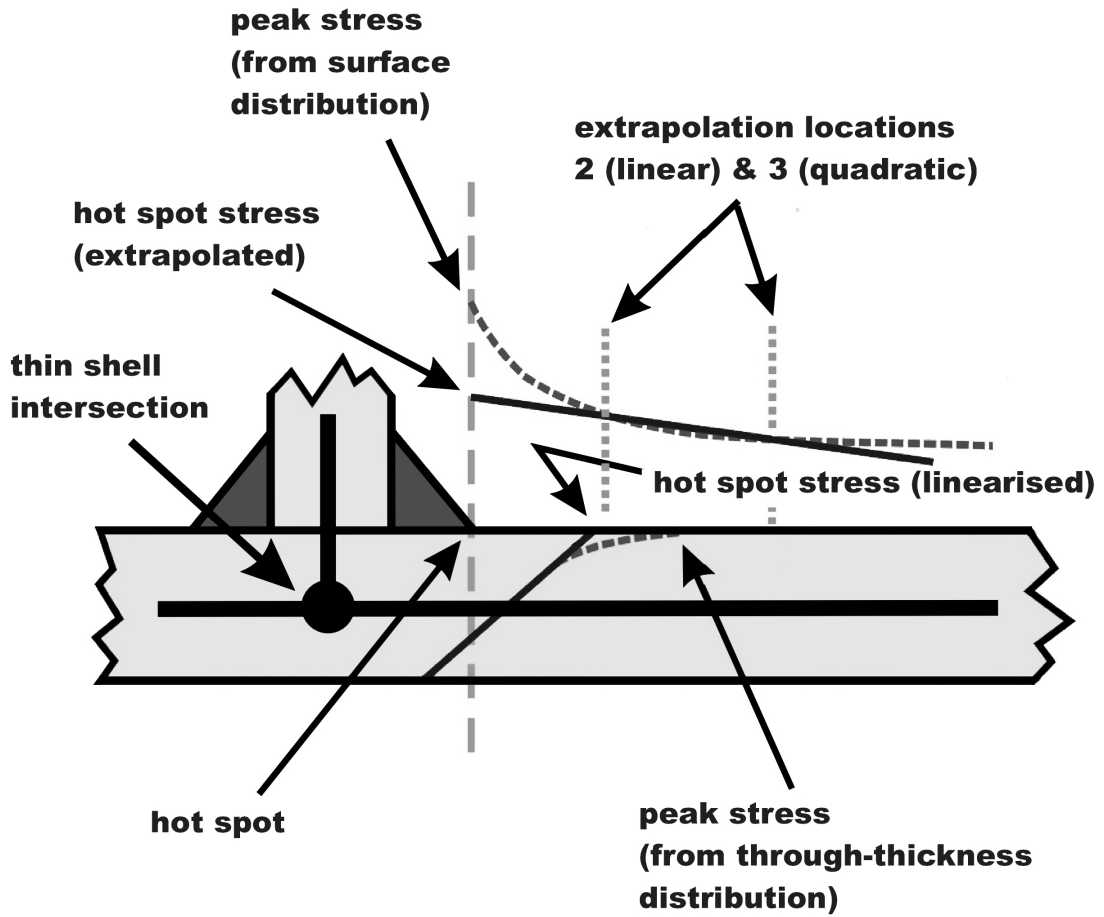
Various Hot Spot Stress Techniques for Intersections and Welds.
